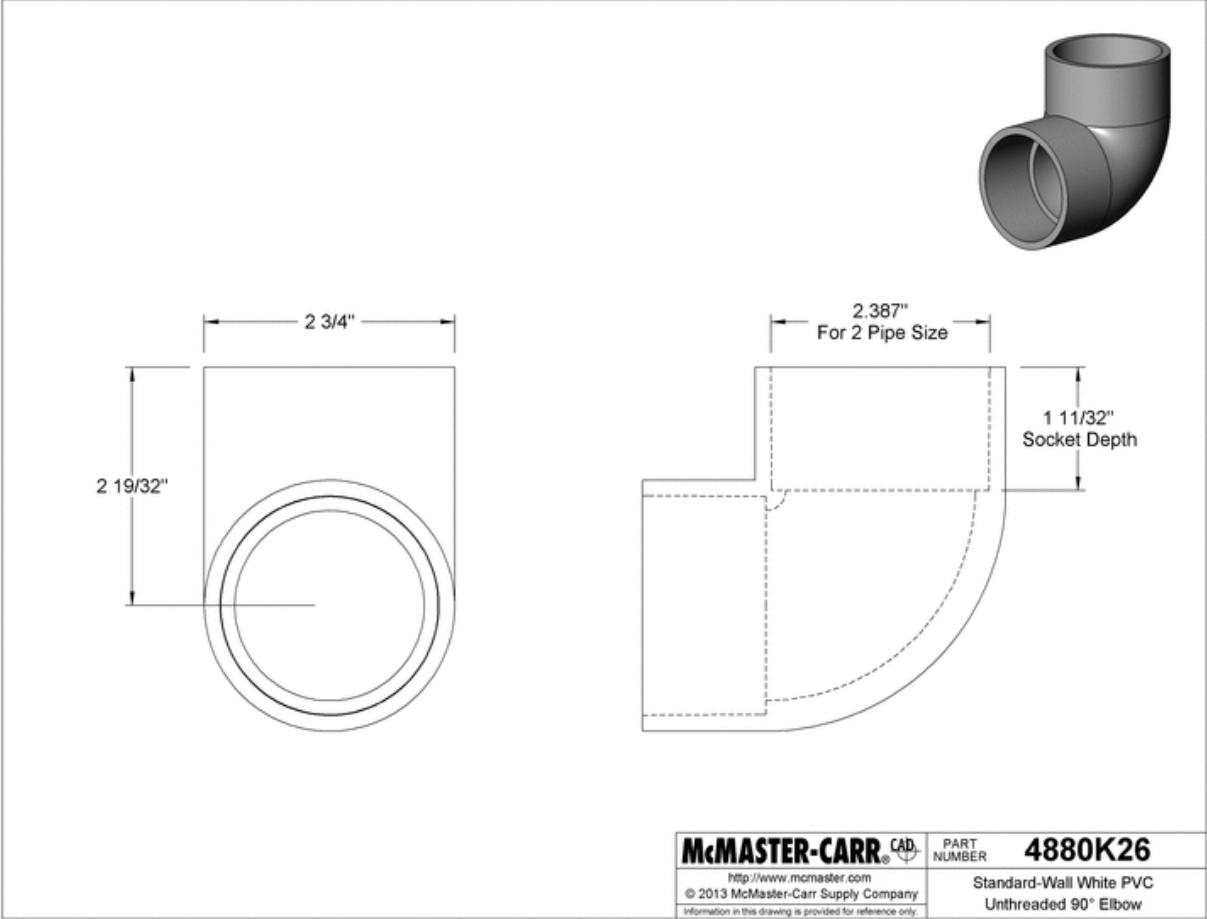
Two Inch PVC Elbow Engineering Drawing [28]
